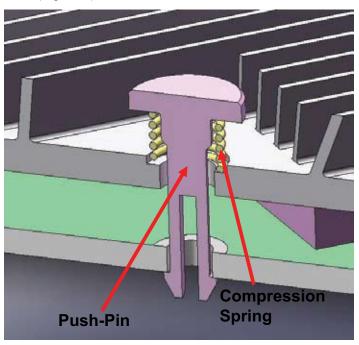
Cross Section View of Push-Pin & Compression Spring Attachment.
